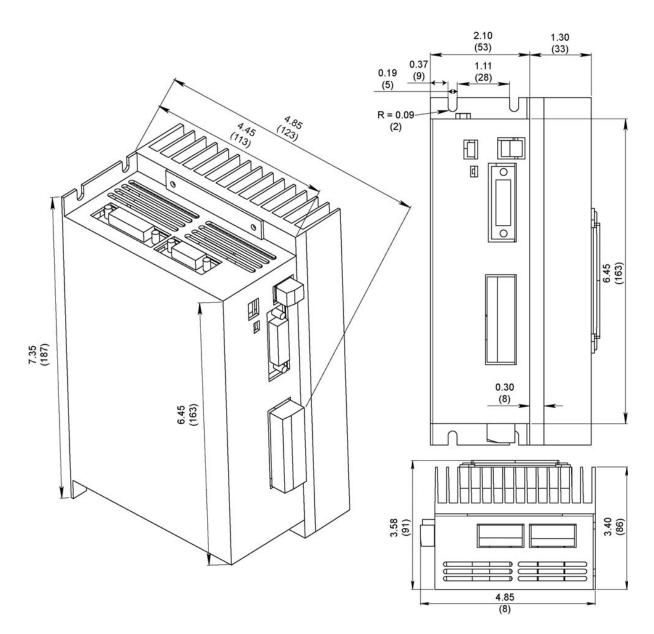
Ruby "8" and "12" Amp Mechanical Dimension
